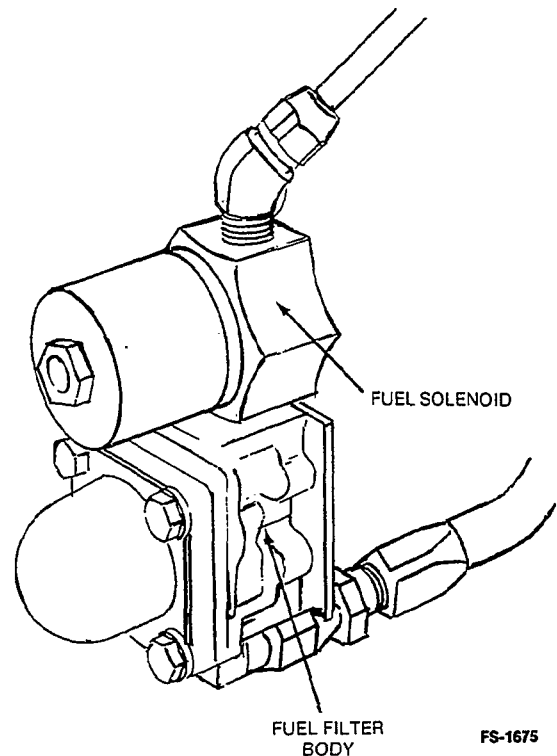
FUEL SOLENOID VALVE AND FILTER
